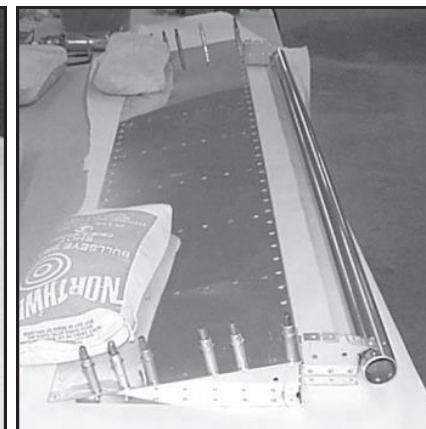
The bottom skin is fitted to the skeleton. Bags of lead shot keep the assembly down tight on the flat worktable.
